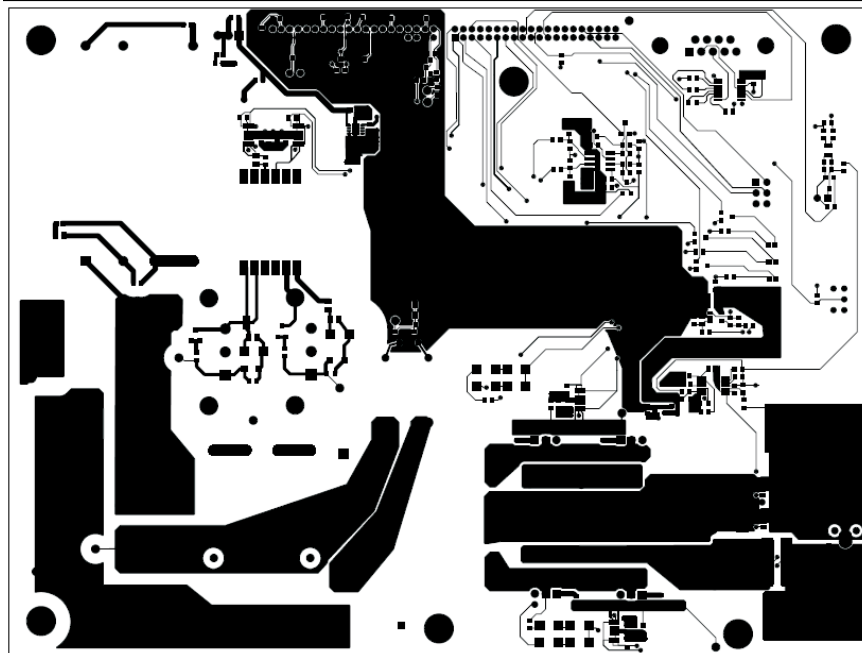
UCD3138LLCEVM-028 Top Copper (top view)
